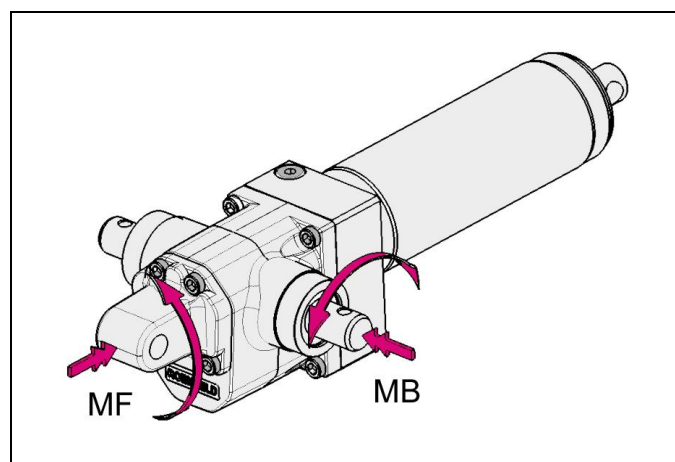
Torque at the operating shaft (MB) and fixing point, example flange type (MF)
